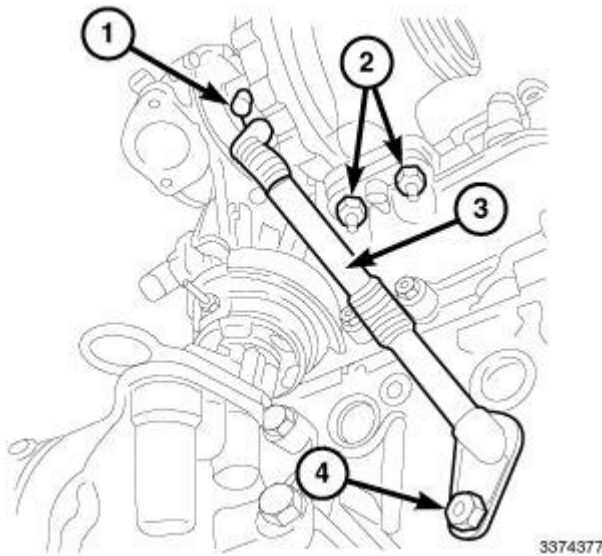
Turbocharger, Oil Send And Return Line & Fasteners
